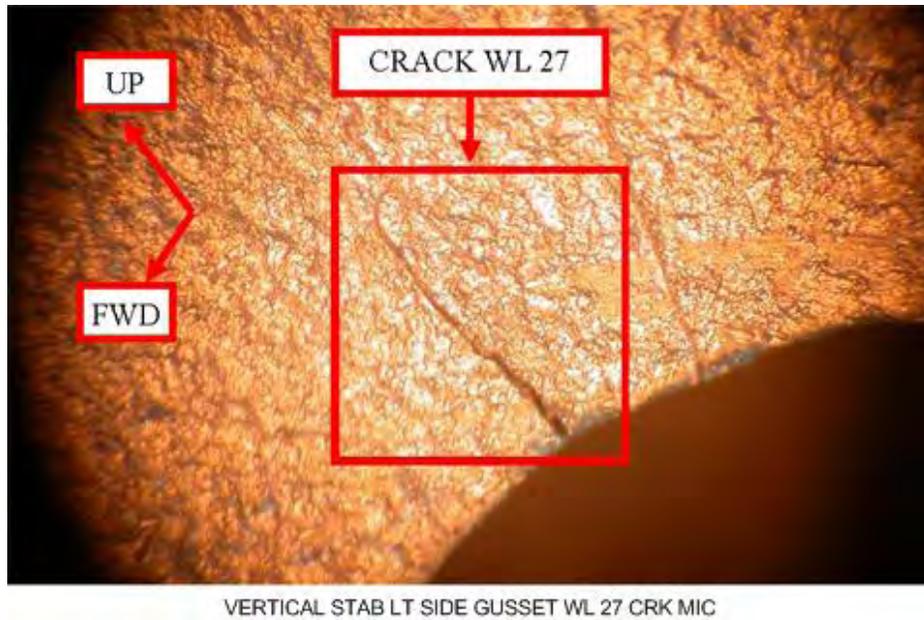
Microscopic View of Crack on the Vertical Stabilizer Left Side Gusset WL 27
